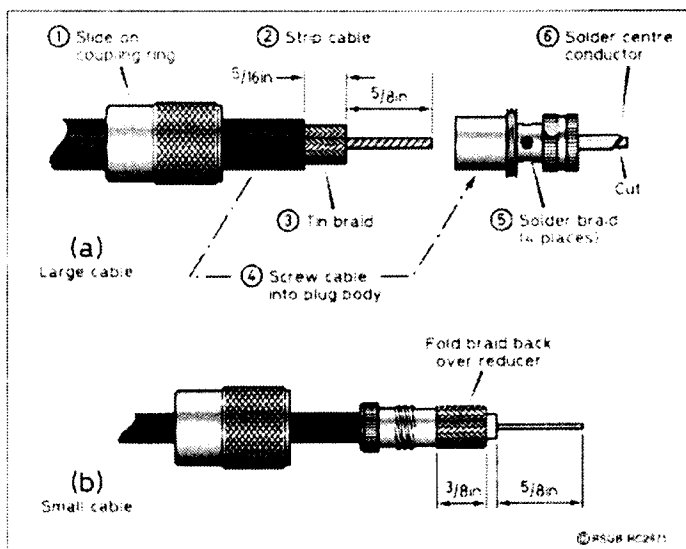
PL259 UHF Connector Assembly. Small cable needs a reducer.
